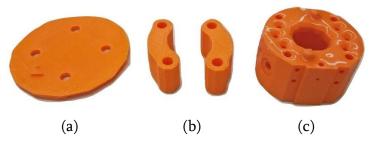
3D Printed Parts: (a) Circular fitting part; (b) Tool-ATC connector; (c) ATC Tool-Side
